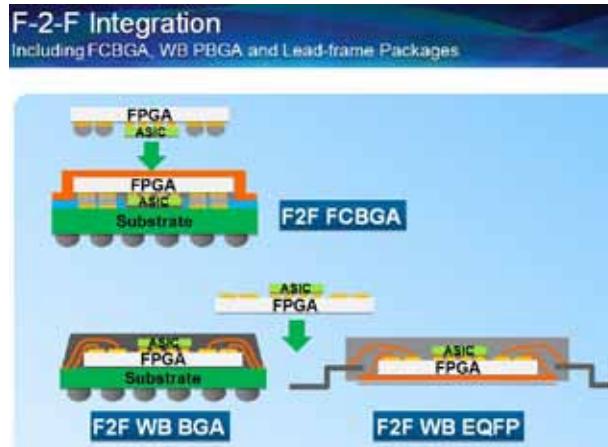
Illustration of three different face-to-face chip-on-chip package configurations.
